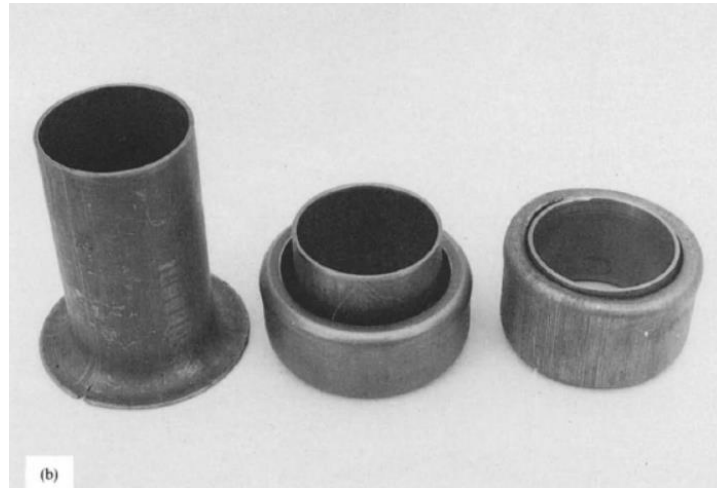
Deformed inversion specimens for 10, 6 and 4 mm inversion radii (S.R. Reid, 1993)
